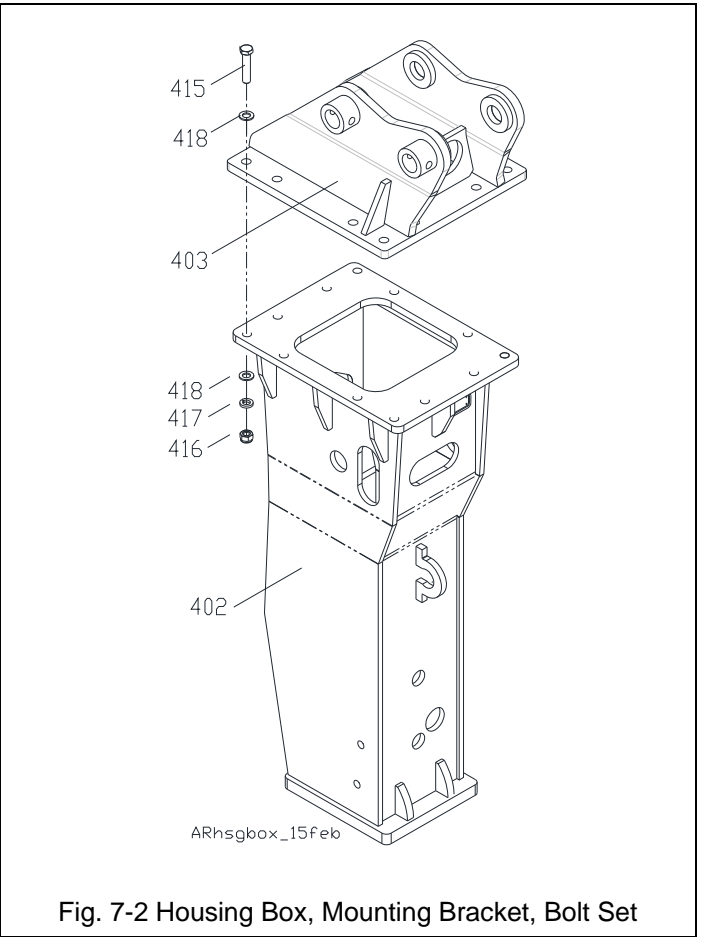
Housing Box, Mounting Bracket, Bolt Set
